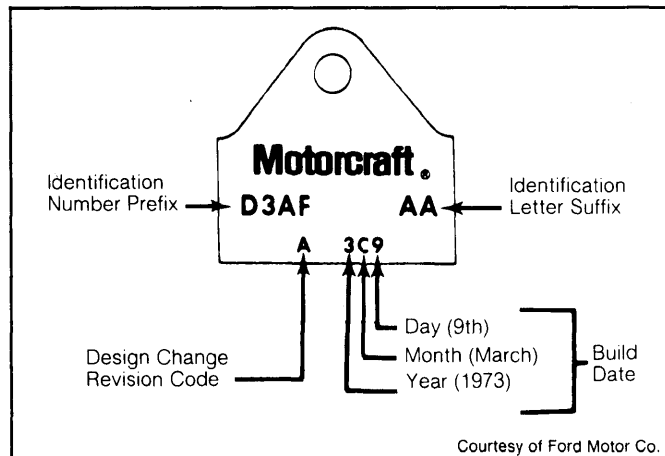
Ford Motor Co. Carburetor Identification Tag
